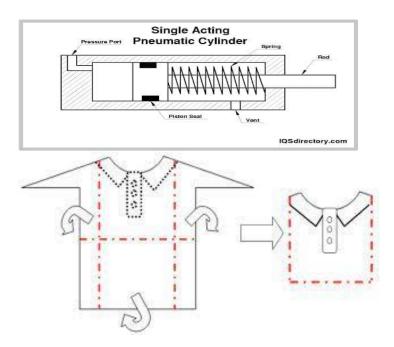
PNEUMATIC SHIRT FOLDING MACHINE
